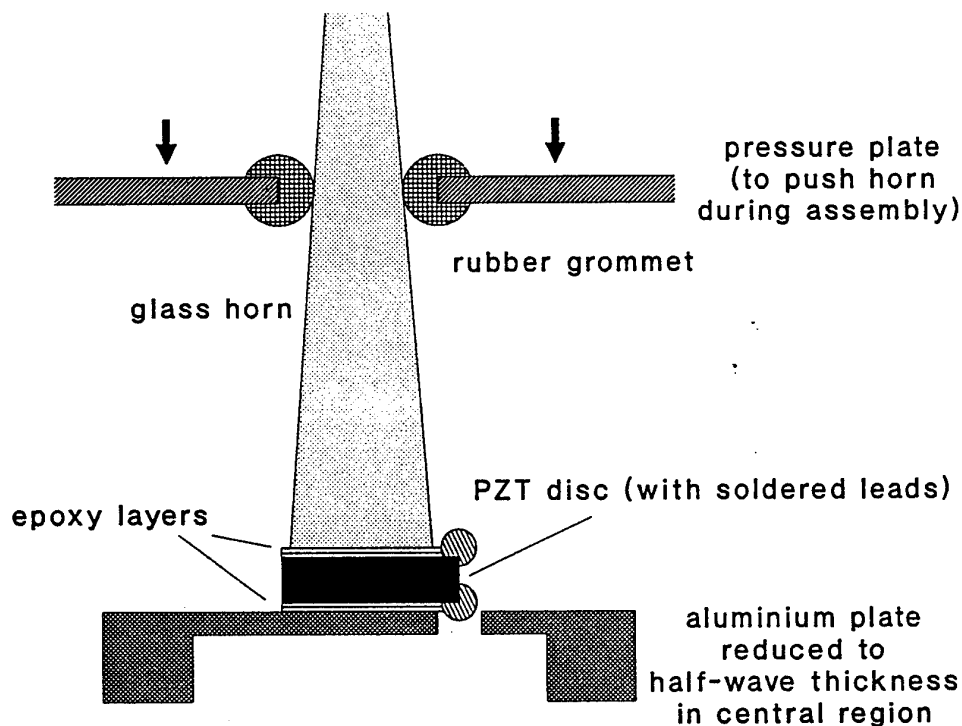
The construction of the transducer assembly. The pressure plate is removed after the horn has been fixed to the disc.
